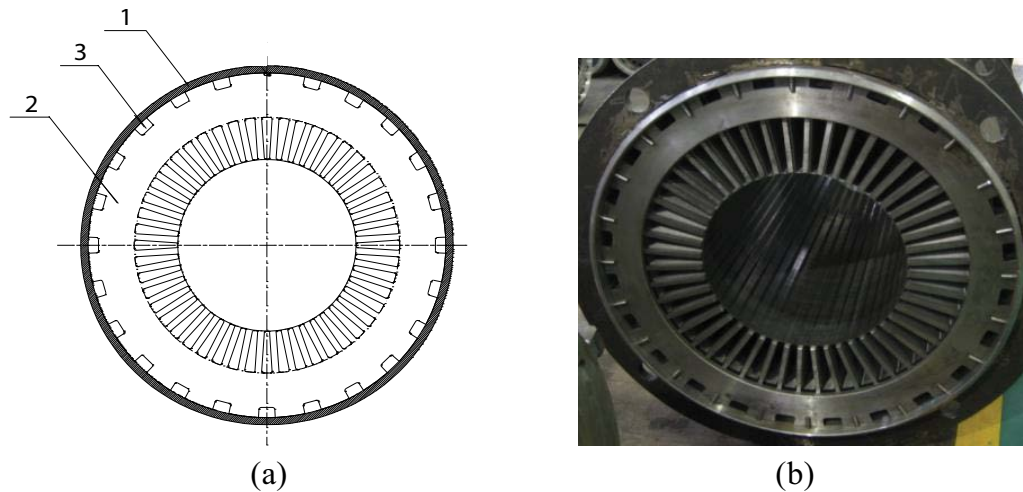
Assembly model of submersible motor cooling structure. 1-Motor casing; 2-Stator component; 3-Cooling channel.
